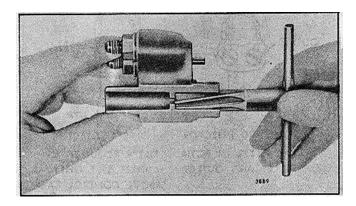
Cleaning Injector Body Ring using Tool J 21089
